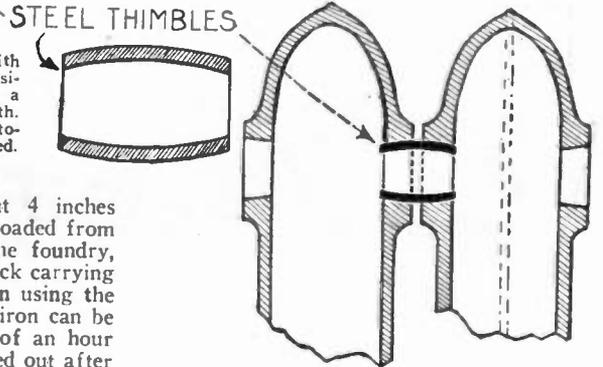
of the drawing shows how the radiator sections, after they have been tested and the holes in the ends of each section machined down to proper size, are joined together by means of spring steel nipples. The radiator sections are pressed together as shown in the drawing on the opposite page by means of a powerful hydraulic or else a motor-driven press.
